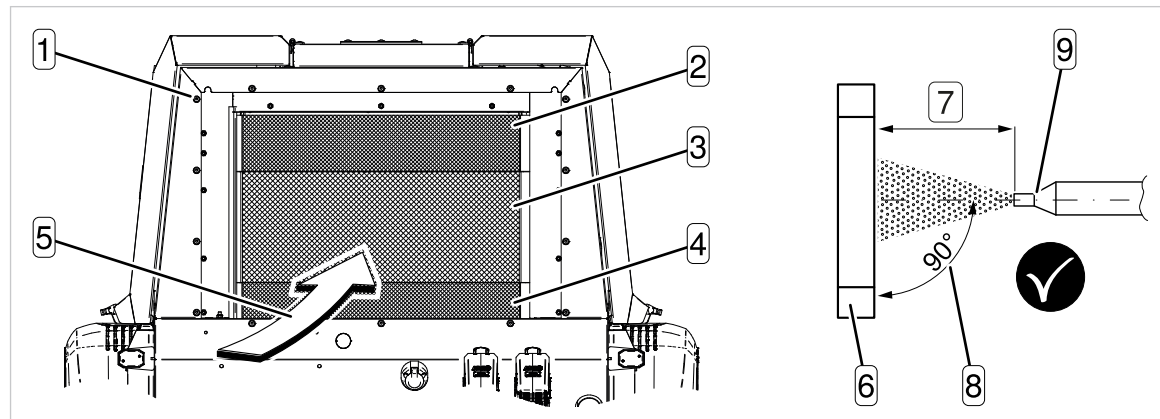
Cleaning the charge air cooler, oil cooler and coolant cooler
